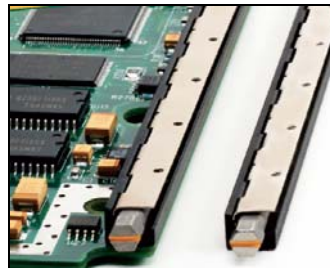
ZIF III board retainer both mounted and un-mounted on PCB.
